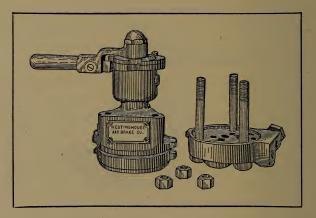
S-6 Independent Brake Valve Removed from Pipe Bracket.
